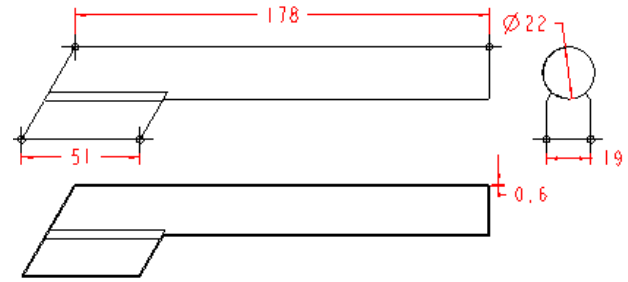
A schematic drawing of the hollow tensile bar used in the casting trial. Dimensions shown in red (mm).
